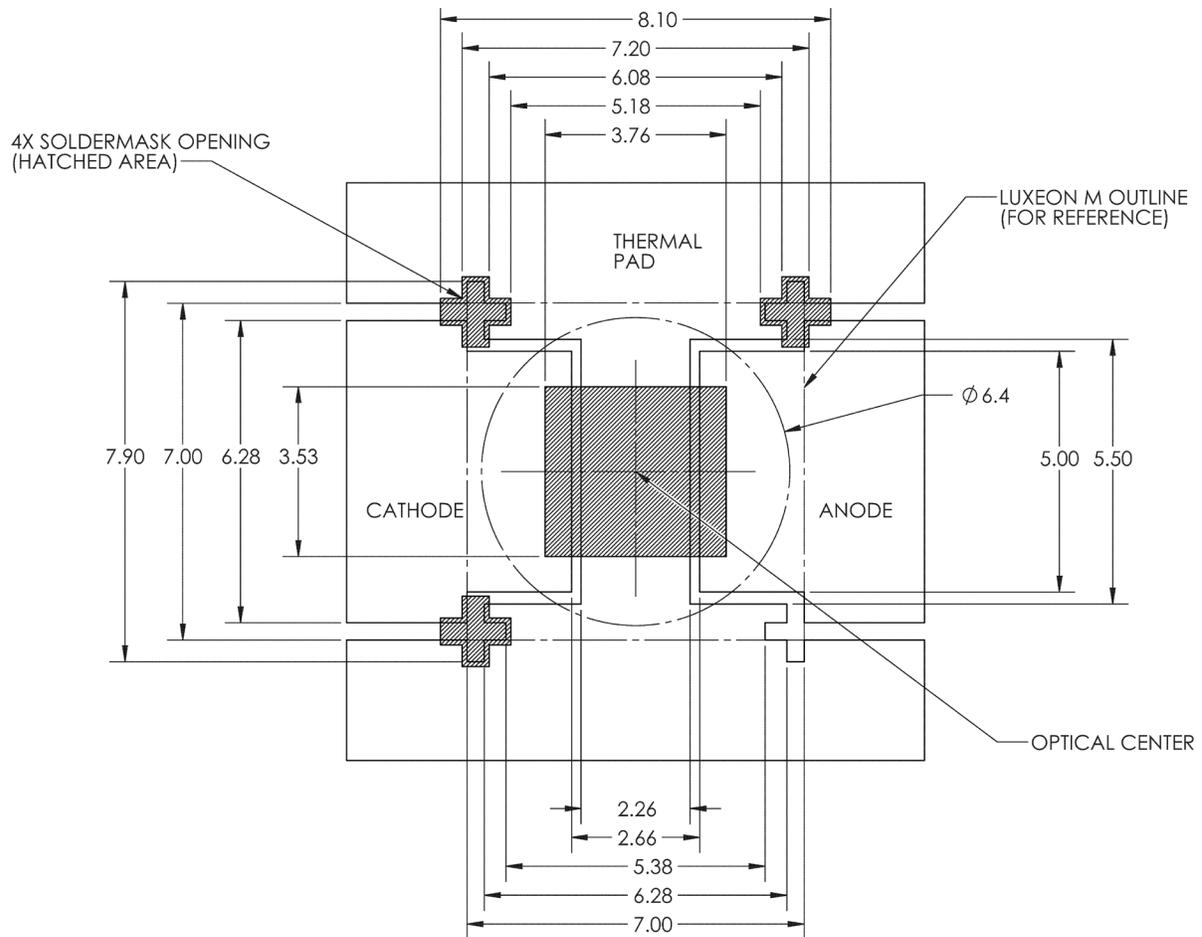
Recommended LUXEON M footprint design for Metal Core PCB. All dimensions are in millimeters.
